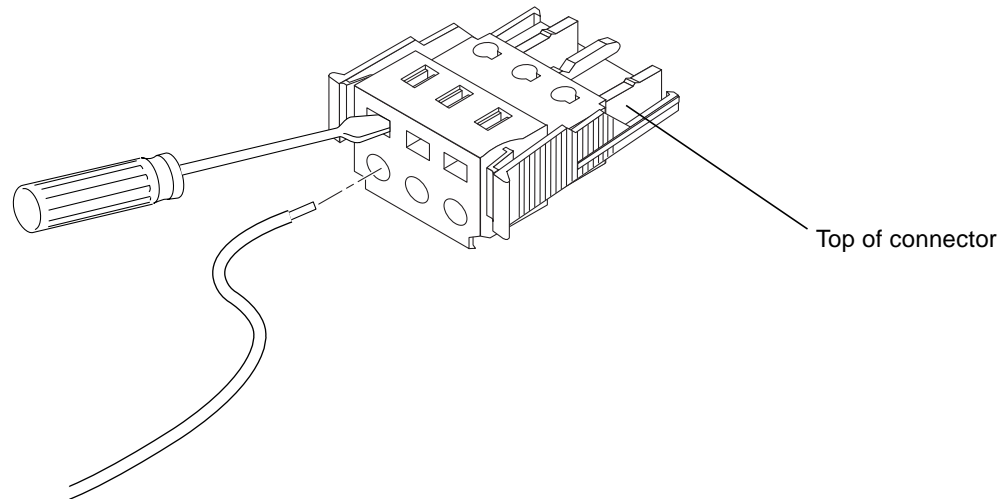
Opening the DC Connector Cage Clamp (Screwdriver Method)
